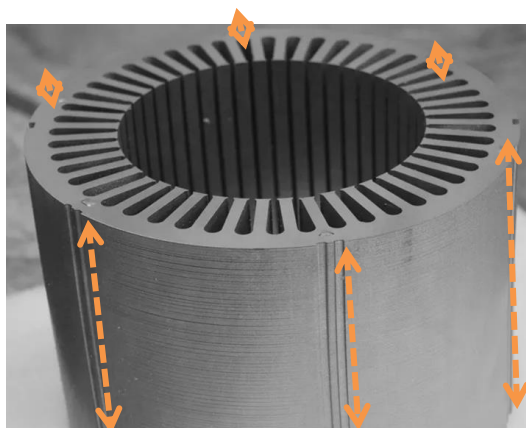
Example of a stator post stacking and welding (weld lines identified by orange arrows)
